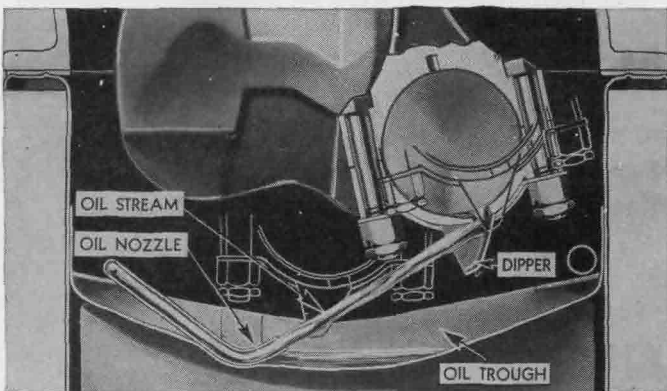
Method of lubricating connecting-rod bearing of engine that is shown in Fig. 11-15. (Chevrolet Motor Division of General Motors Corporation)
